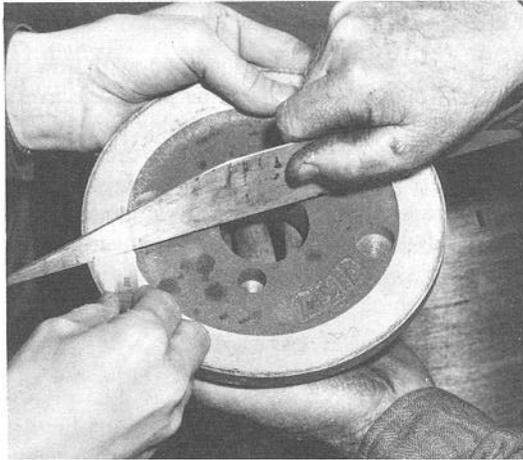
Position a machined straightedge across the face of the collar and check for the amount of taper with a leaf gage on the inside edge of the bearing surface.
